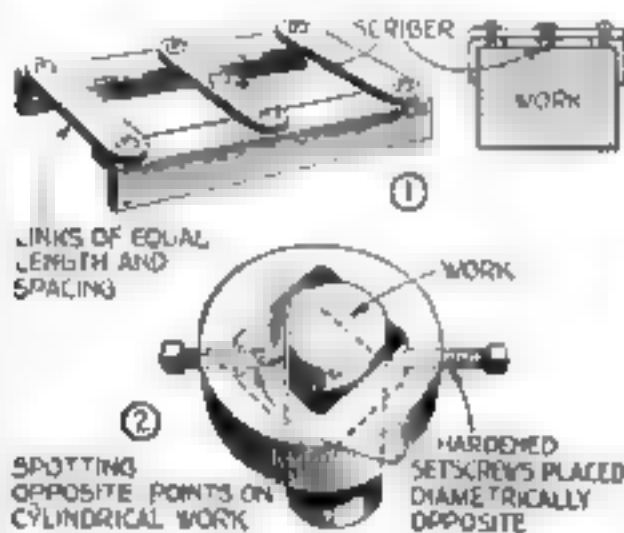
is a tool for scribing a center line. Fig. 2 is used for locating points on round stock.
